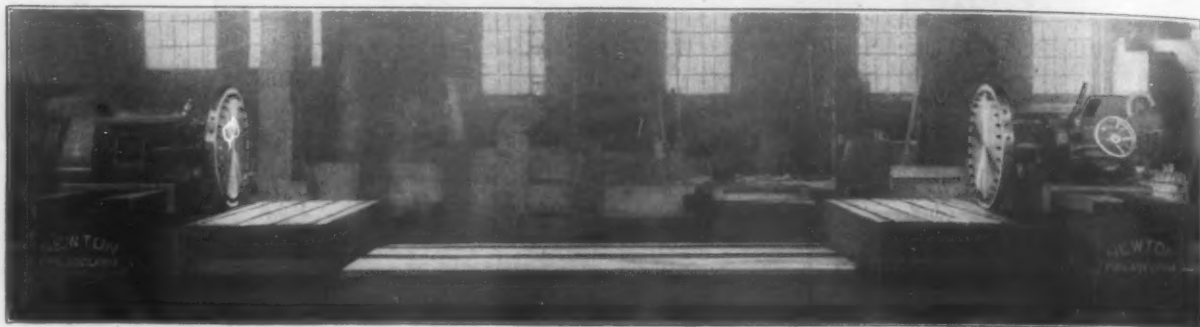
Front View of a New Rotary Planer Built by the Newton Machine Tool Works, Inc., Philadelphia, Pa.
